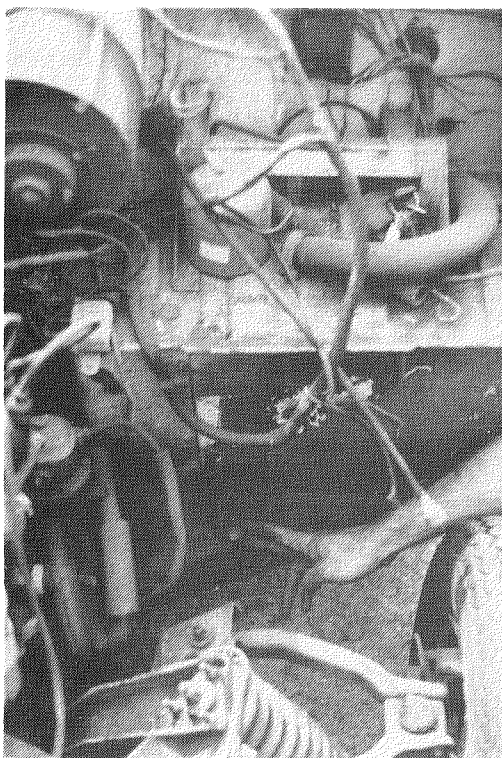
Next, unscrew the two front bulkhead mounting bolts.
